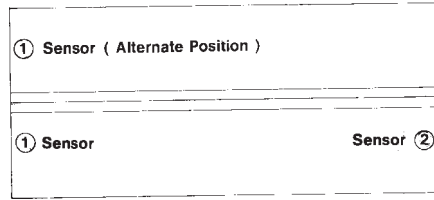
Typical Sensor Placement for Two-Channel AE Monitoring of a Linear Weld
